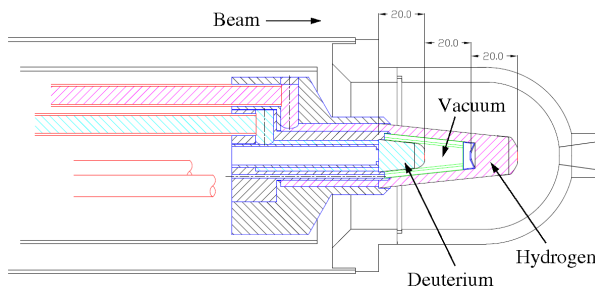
G_M^n target design drawing. Dimensions are in mm .
